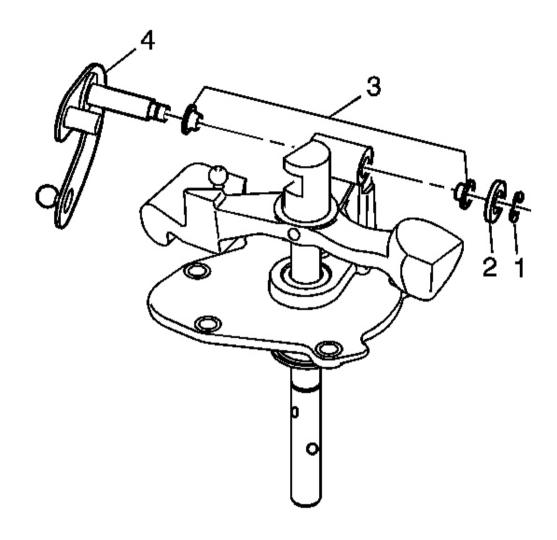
Retainer, Washer, Select Lever & Bushings Courtesy of GENERAL MOTORS CORP.
